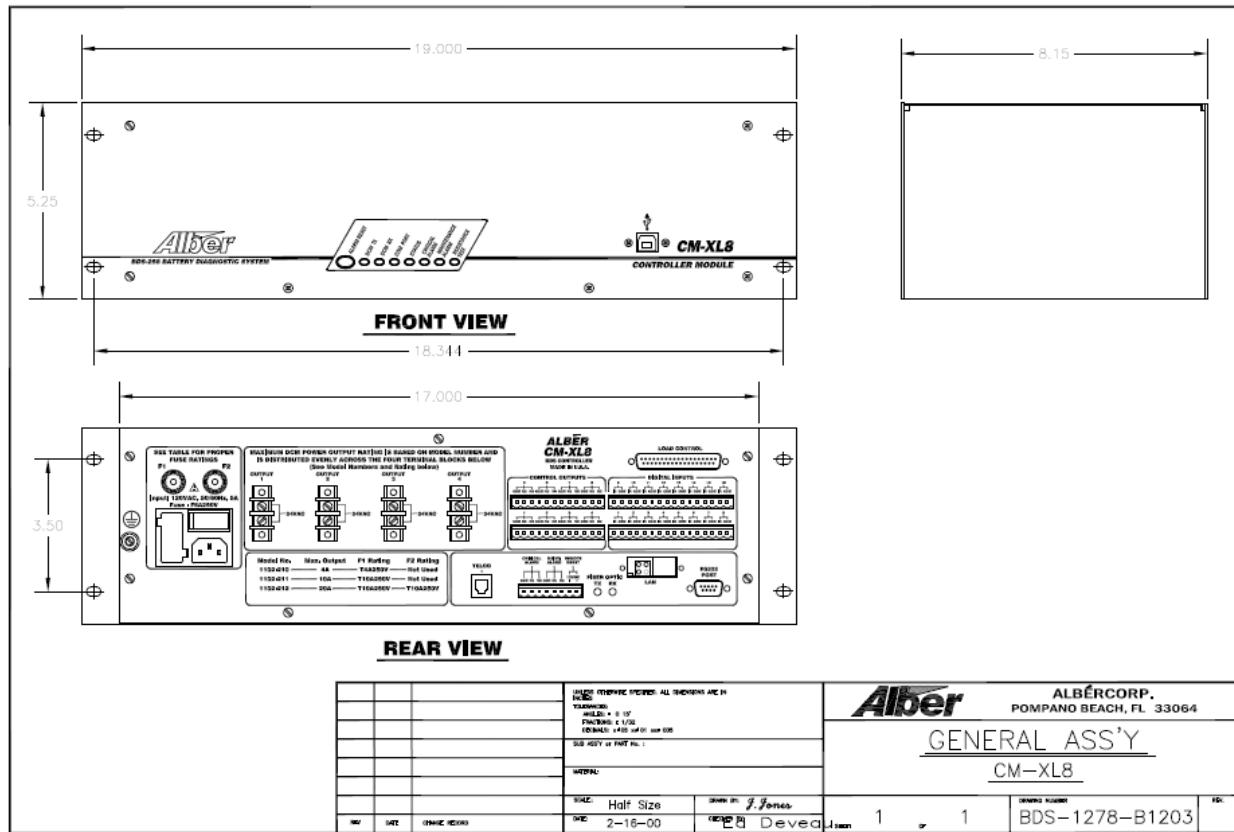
BDS-256XL Front and Rear View General Assembly CM-XL8 Drawing
